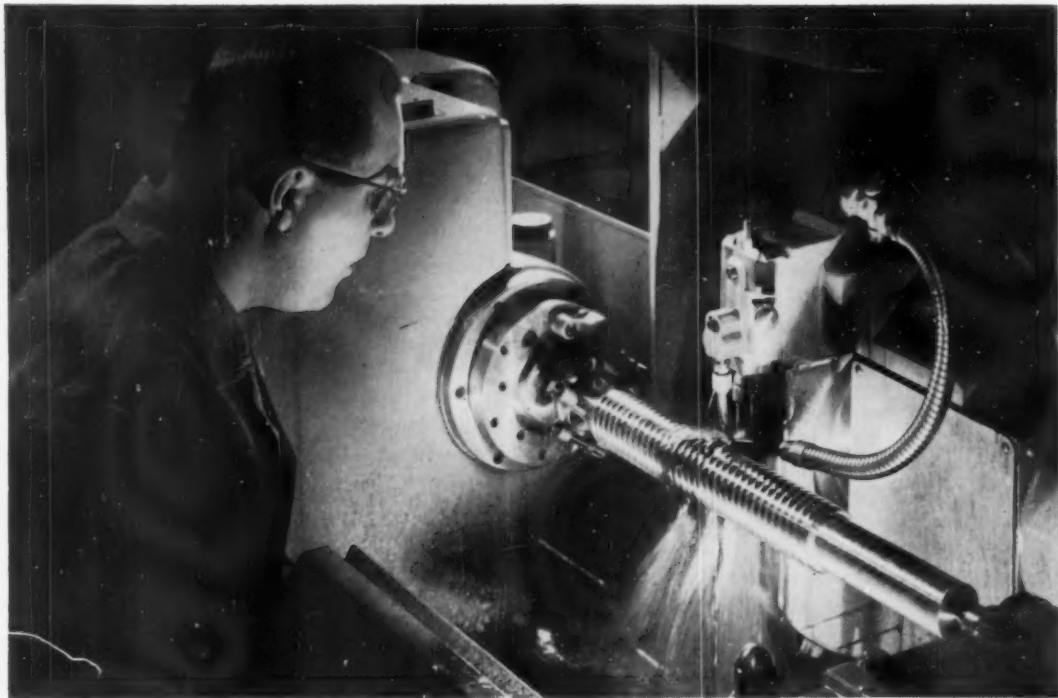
An oil is needed for maintaining accurate wheel form in thread grinding.
